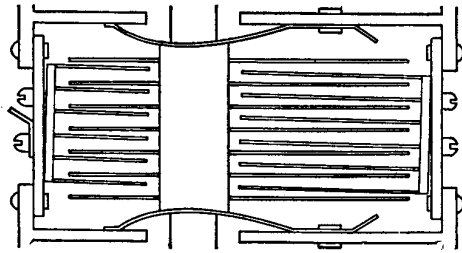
Stator plates out of parallel alignment because of loosened holding screws.
